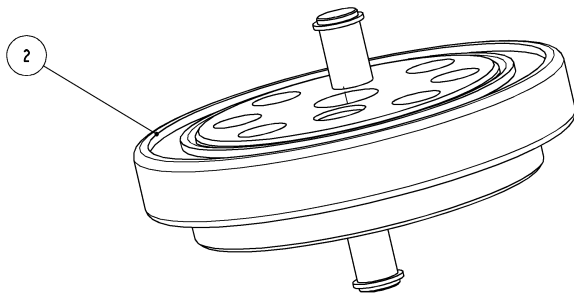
1902800: GEAR AND BEARING RING ASSEMBLY
